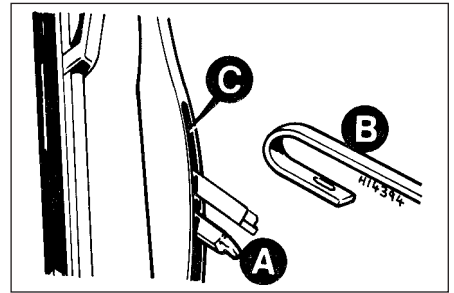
Windscreen wiper blade fixing (Sec 24)
